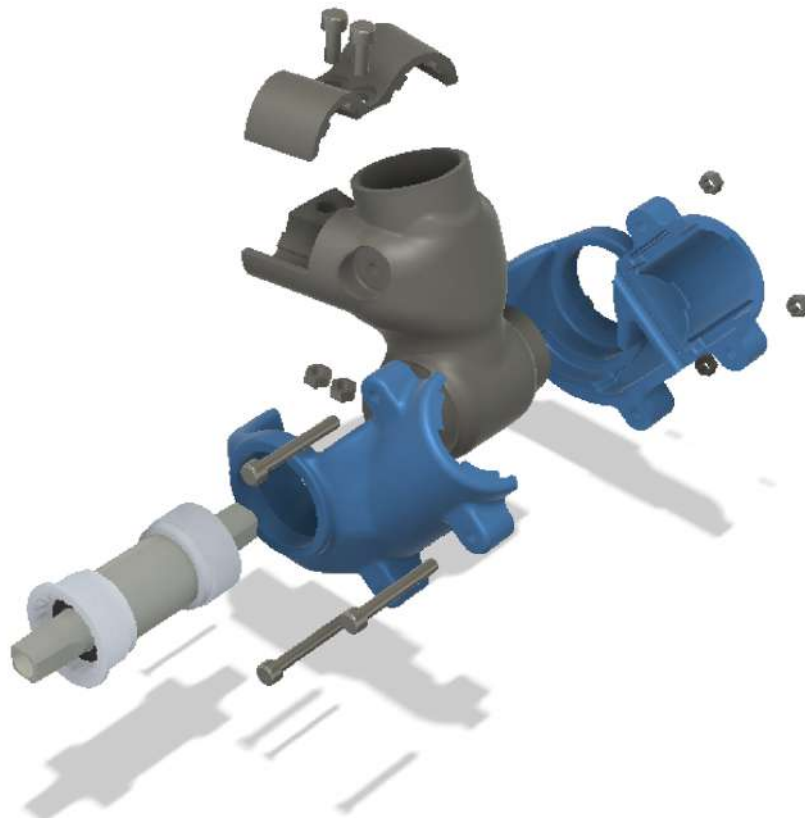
BOTTOM BRACKET ASSEMBLY
